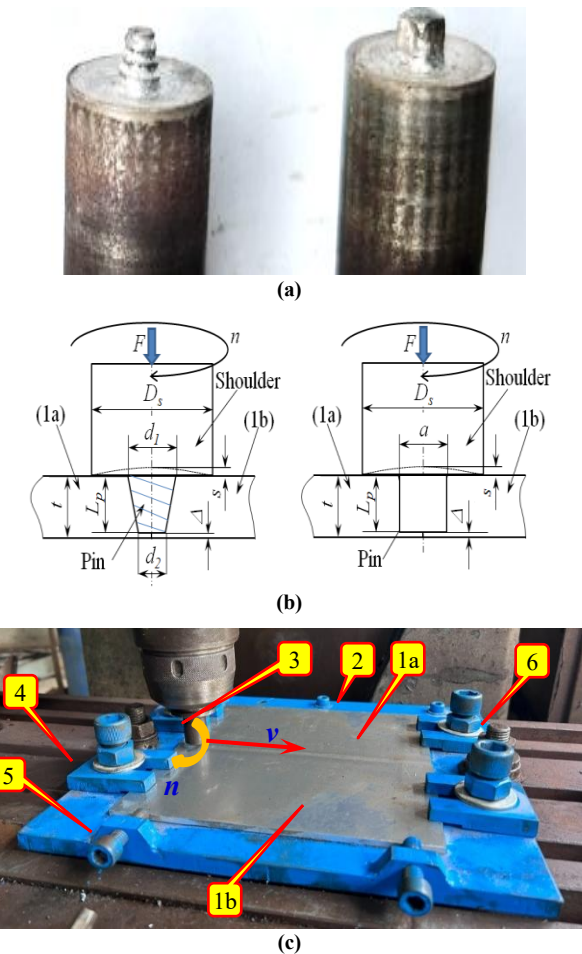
Experimental setup, (a) Welding tools, (b) Tool dimensions, and (c) Setup on the milling machine, (1) Workpieces, (2) Fixture, (3) Tool, (4) Clamping plates, (5) Bolts, (6) Fixing bolts.
